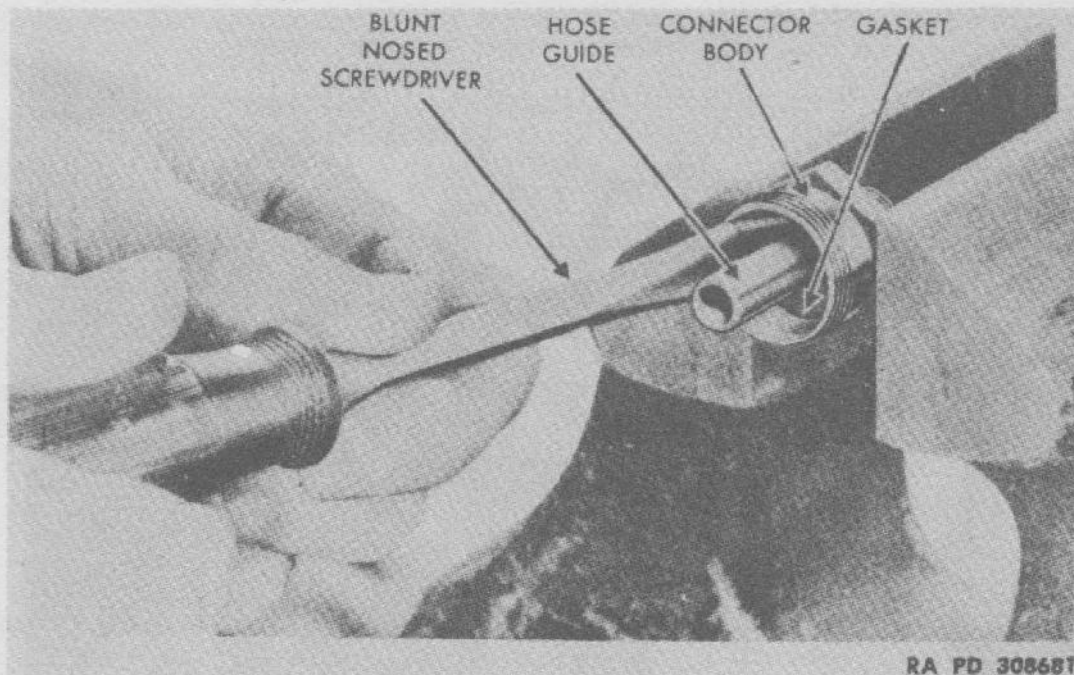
Pushing Gasket into Bottom of Recess of Connector Body
